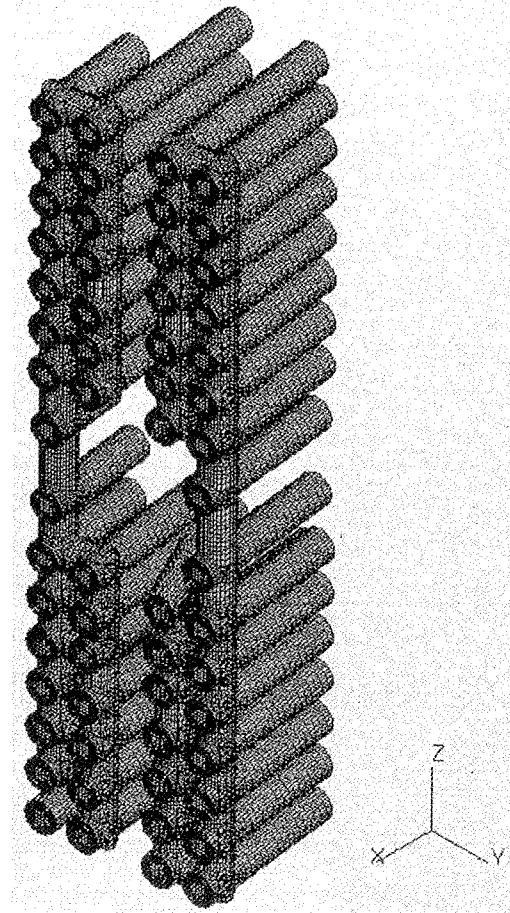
Isometric view of coolant channels (module edge side)
